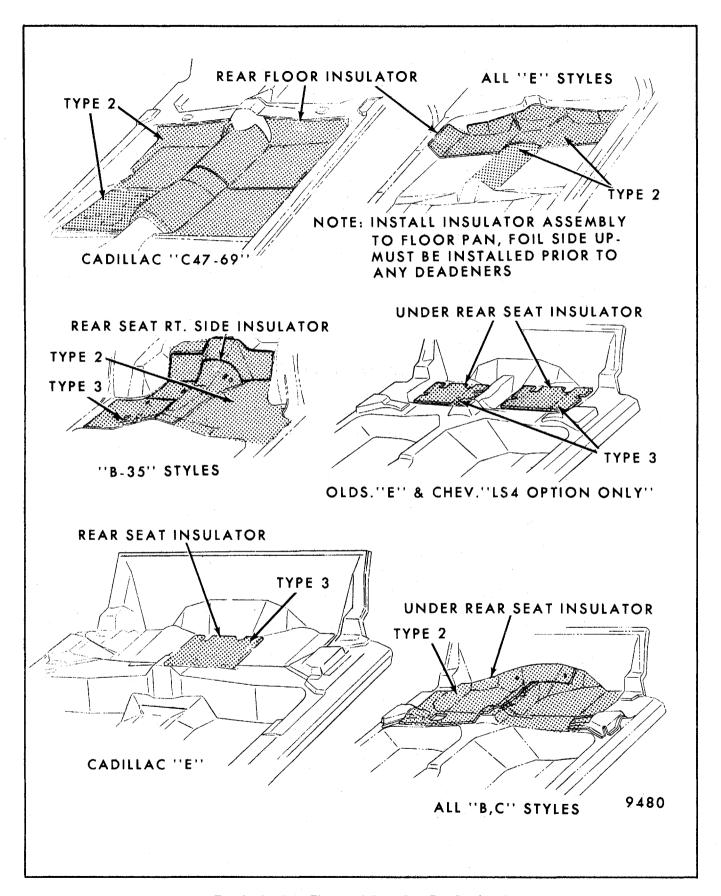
Rear Floor and Rear Seat Pan Insulators
